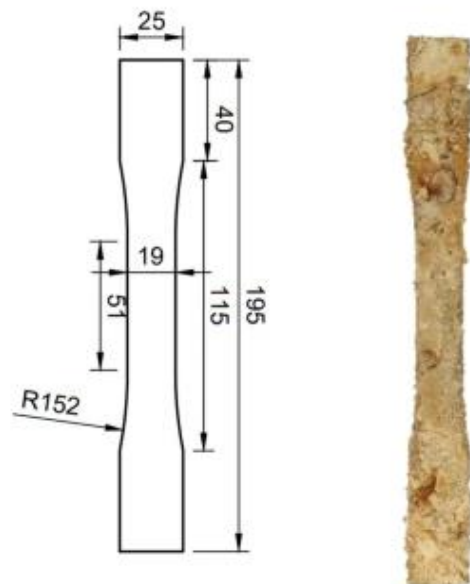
The dimensions (mm) and a typical picture of testing specimen used for tensile tests.
